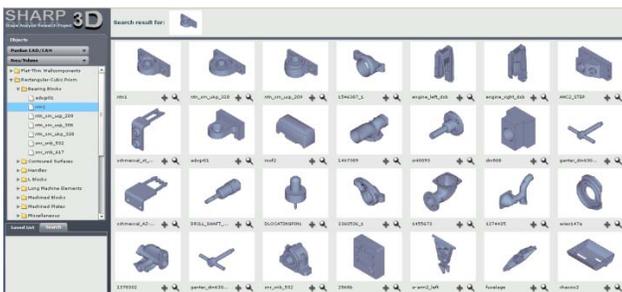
Bearing Block searching results shows similar in shape to the component displayed on the top.
